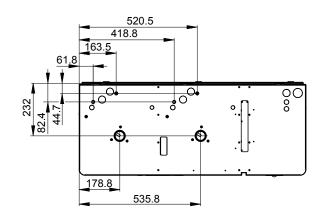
Unit dimensions unit "M" (dimensions in mm)
